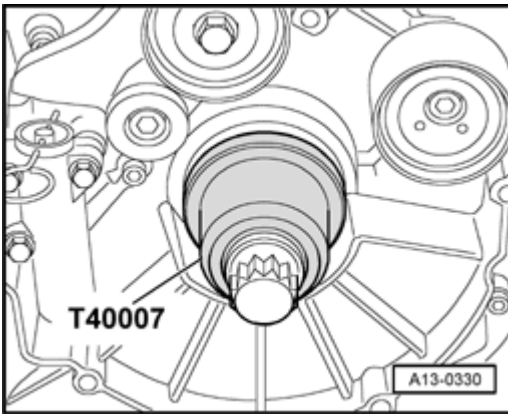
Pressing In New Seal Up To Stop Using Pressure Piece T40007
